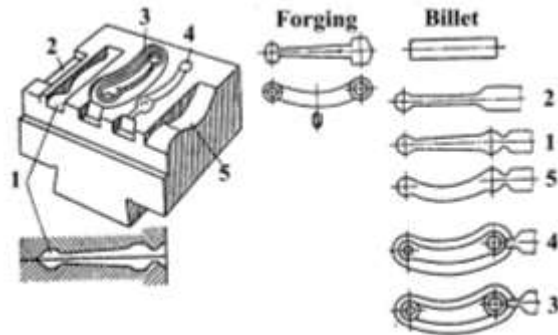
Draught of a forging, die, multiple-impression die and sequence of operations, carried out in the die (2-1-5-4-3). Impressions: 1 – rolling; 2 – extending (fuller); 3 – finishing; 4 – blacking; 5 – bending
